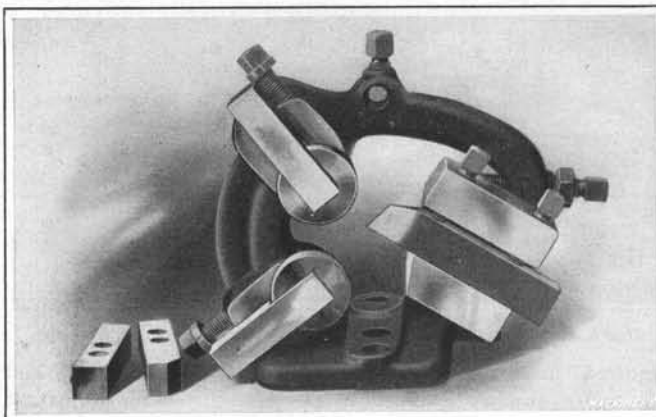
Standard Type of Turner for Use on Gridley Automatic Turret Lathe
